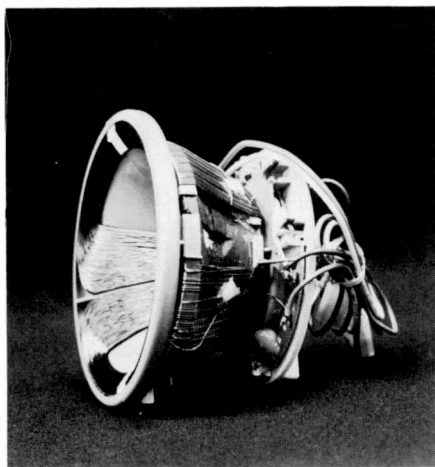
The plastic end caps have a shape that allows them to fit accurately to the horizontal coil insulator during final assembly.
